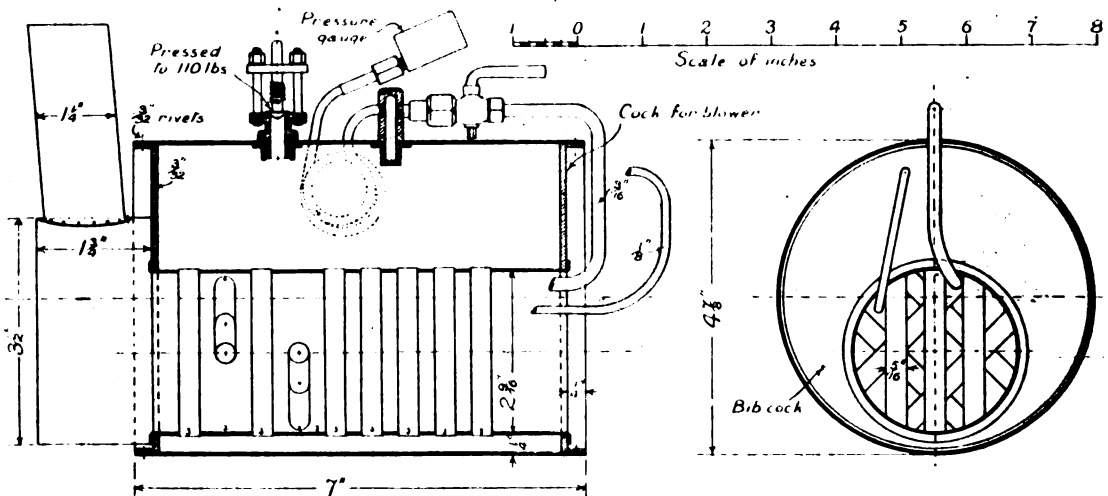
THE BOILER OF METRE BOAT, "HERMES."
